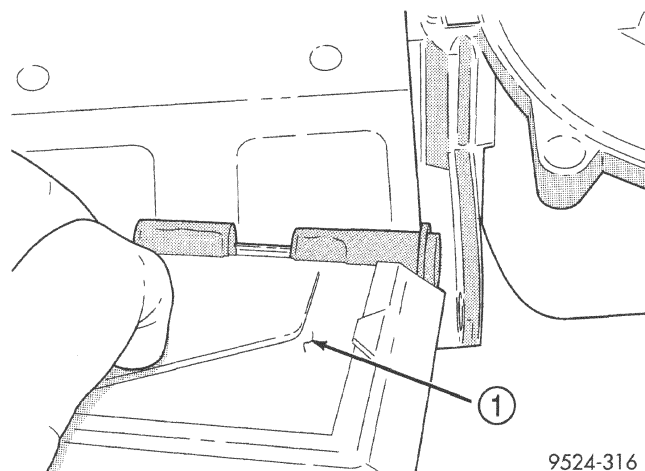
Front And Rear Housing Halves1 - REAR COVER
